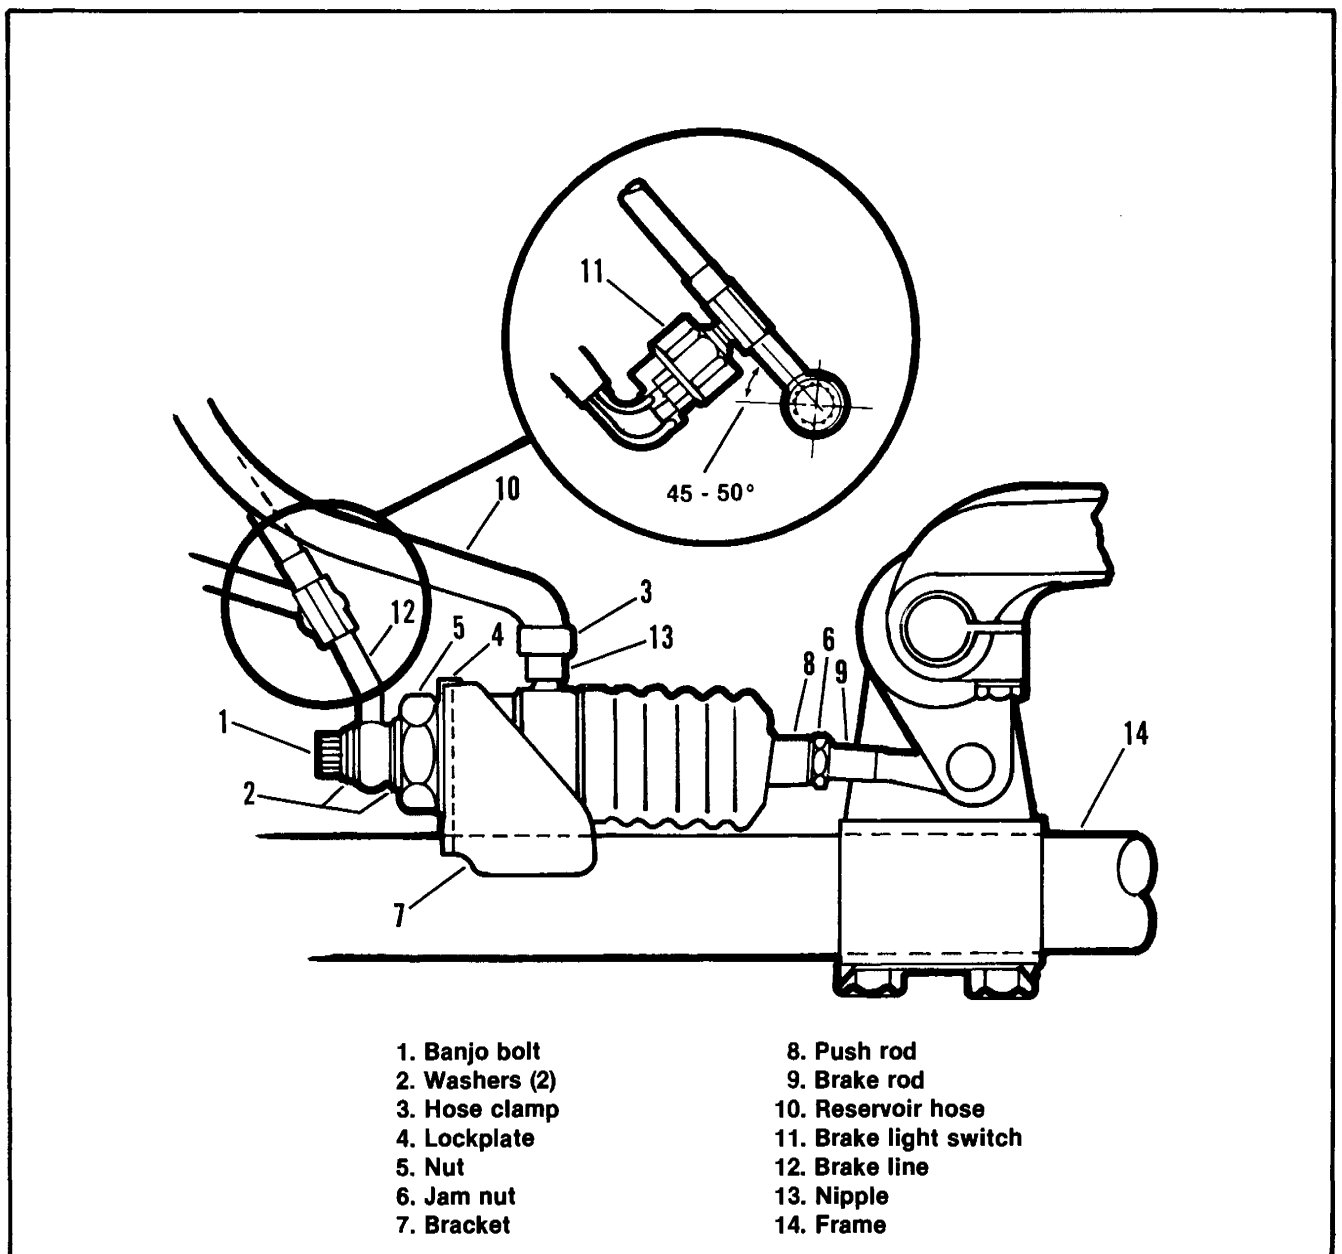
Master Cylinder Mounting - Late 1987 and Later
